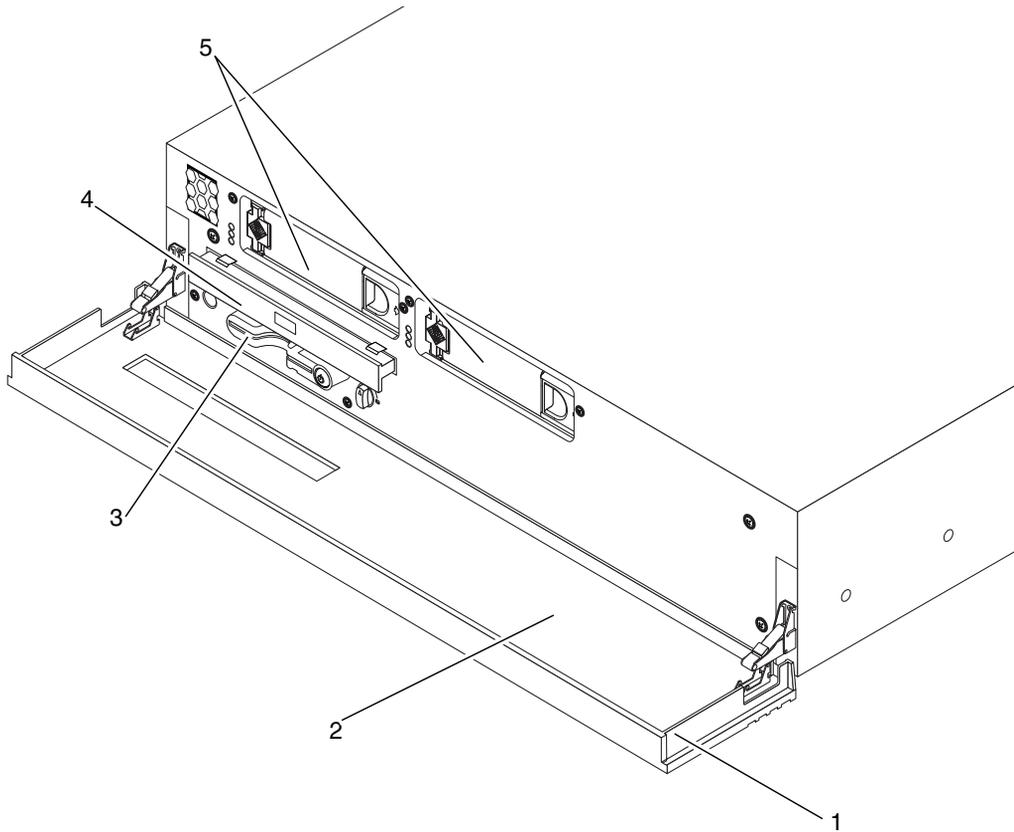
Illustrated Parts Breakdown, Front Panel Components
